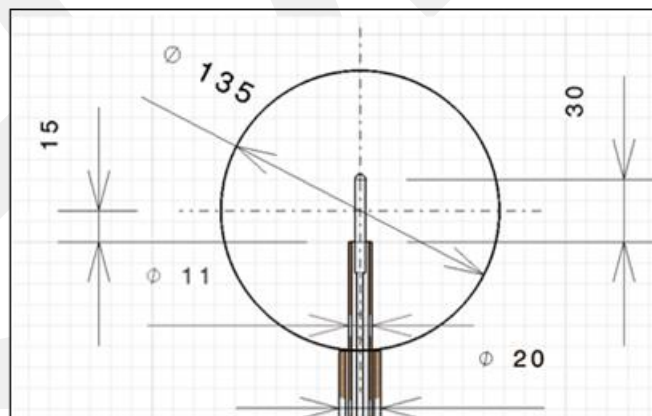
The Technical Drawing of the Matt-Blackened Copper Sphere.
